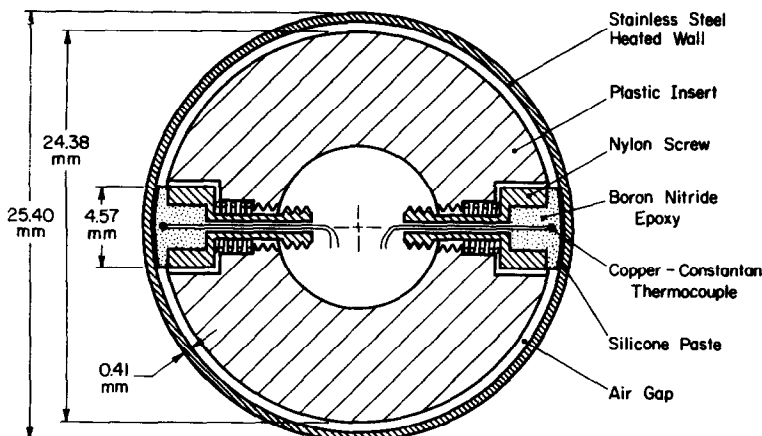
Cross-sectional view of the inner thermocouple assembly.
